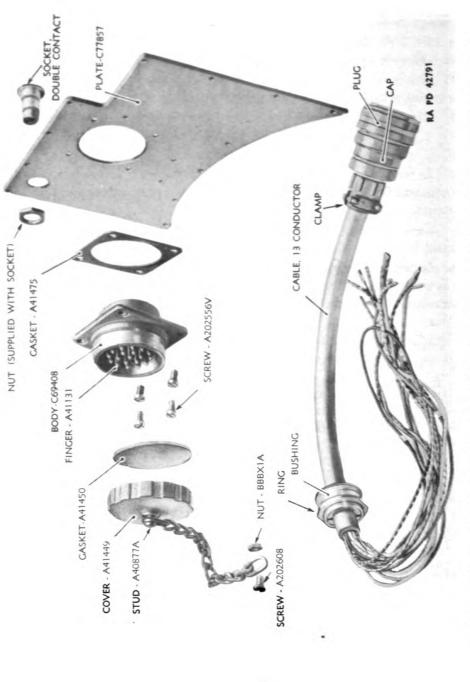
Cradle Junction Box Plate Assembly and 13-conductor Cable Assembly
